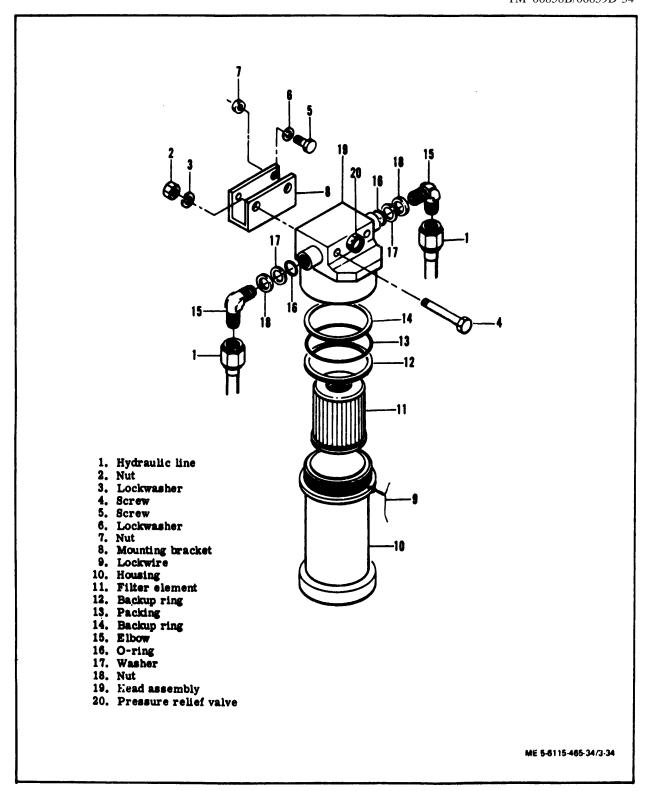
Hydraulic System Filter Assembly, Exploded View
